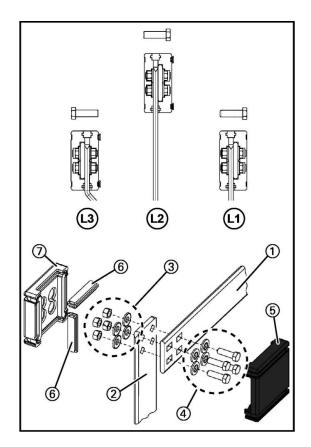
Busbar 1250 A, feeder ≤ 1250 A, Ur = 24 kV, end panel with insulating shells
